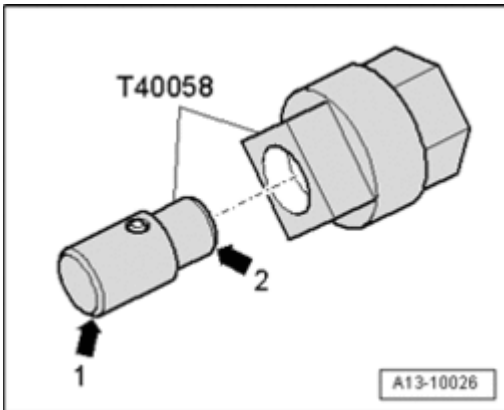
Inserting Guide Pin Of Adapter T40058 So Small Diameter Points To Engine
